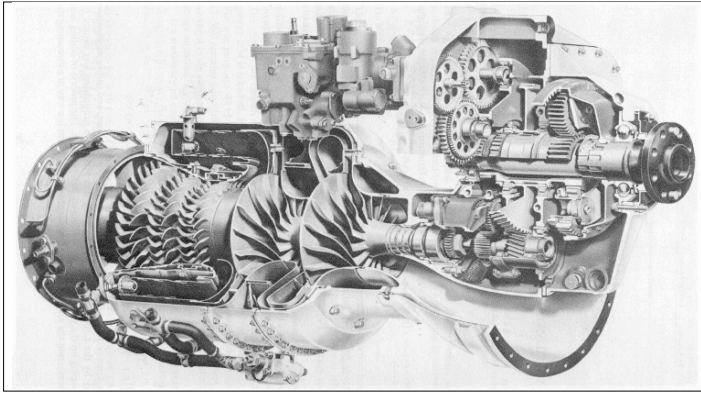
The Garret TPE-331-14 1,227 kW single-shaft turboprop engine.
